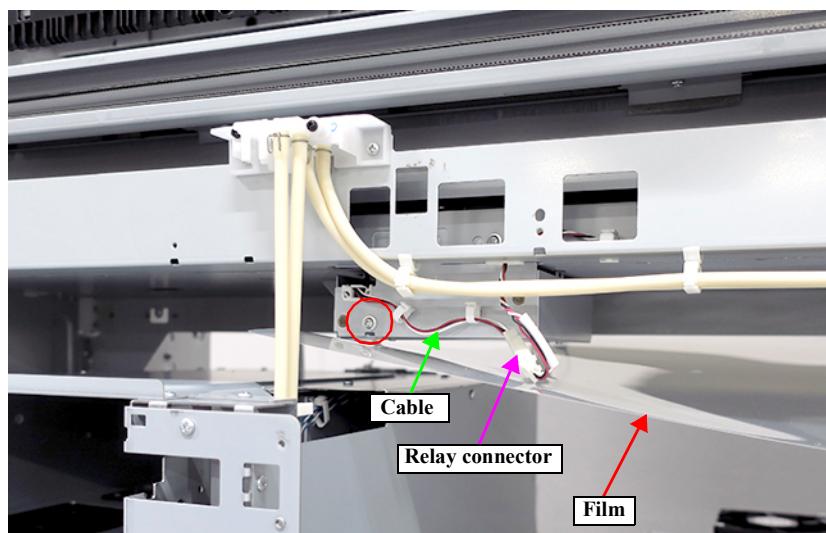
Removing the SUCTION FAN LEFT (1)
